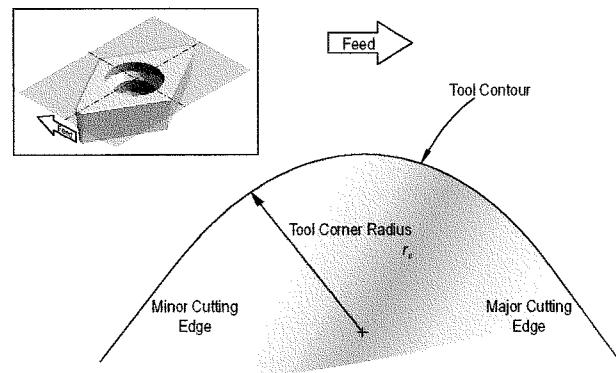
Cutting tool features in the tool reference plane  $P_r$
